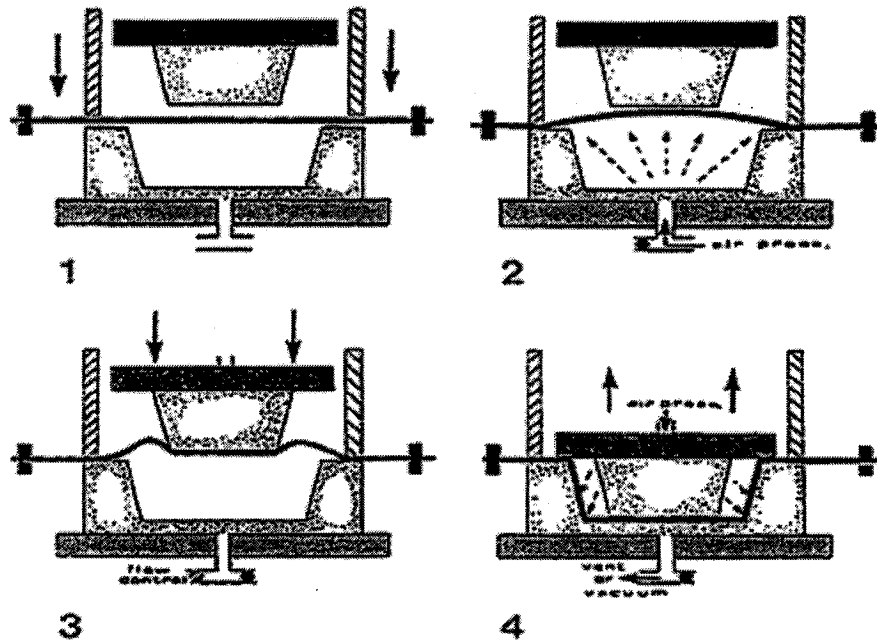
Forming sequence for reverse draw with plug-assist forming [25]
